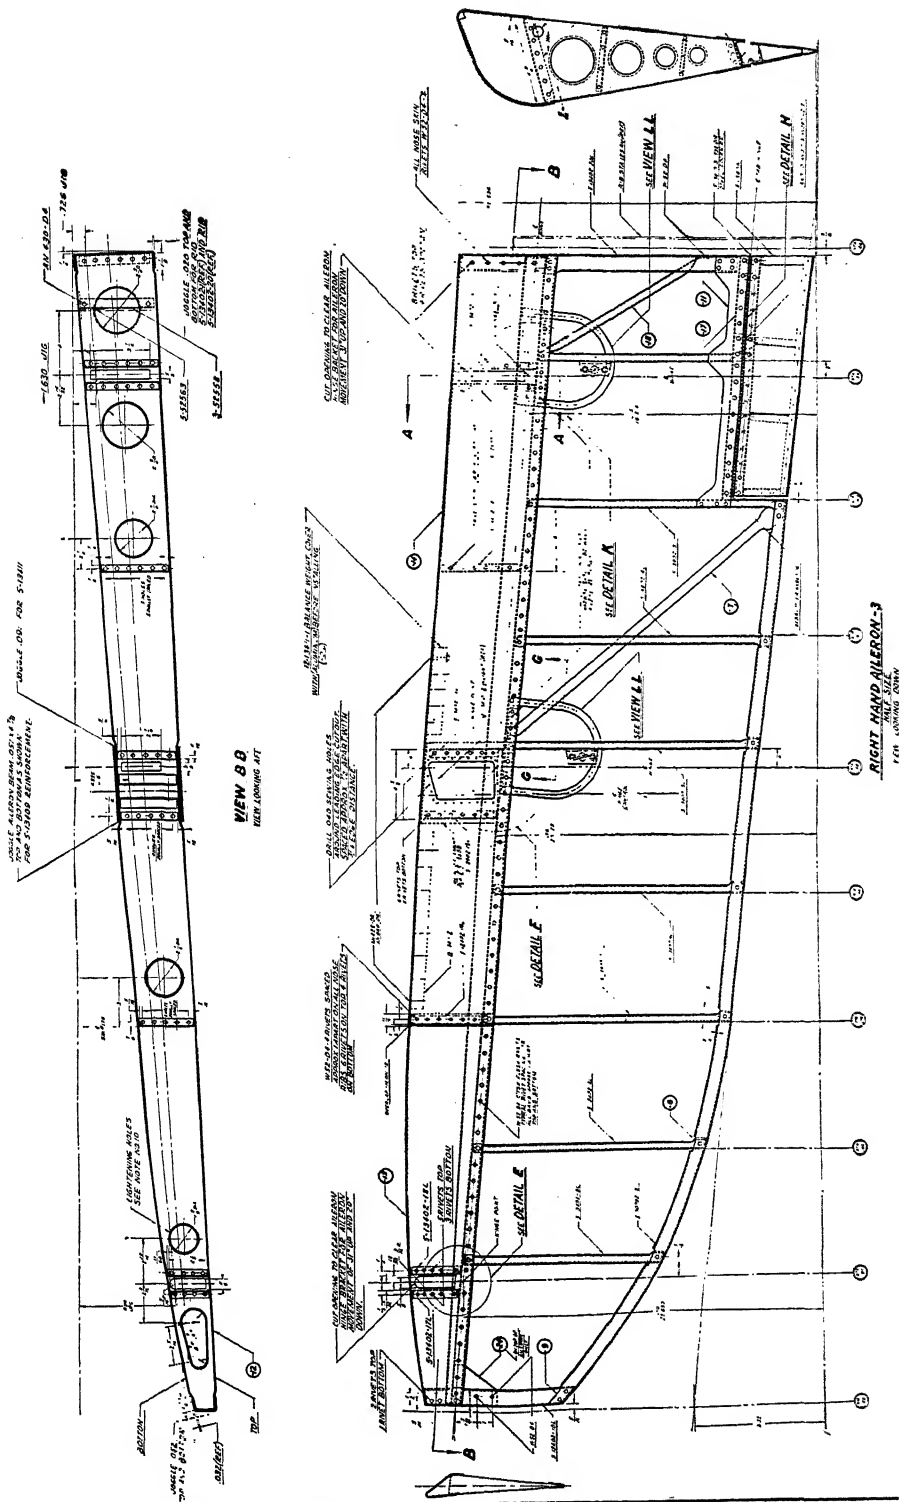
Part of a Drawing of an Aileron Assembly. (Brewster Aeronautical Corporation.)
